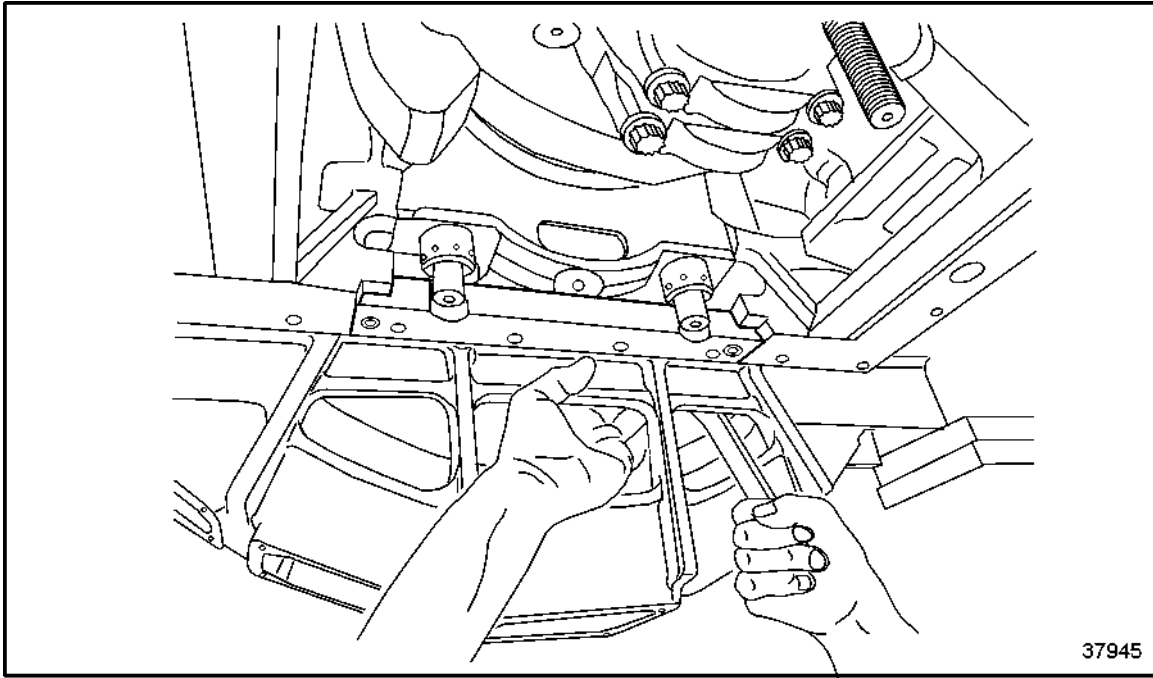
Removing Main Bearing Stabilizer Bolt
